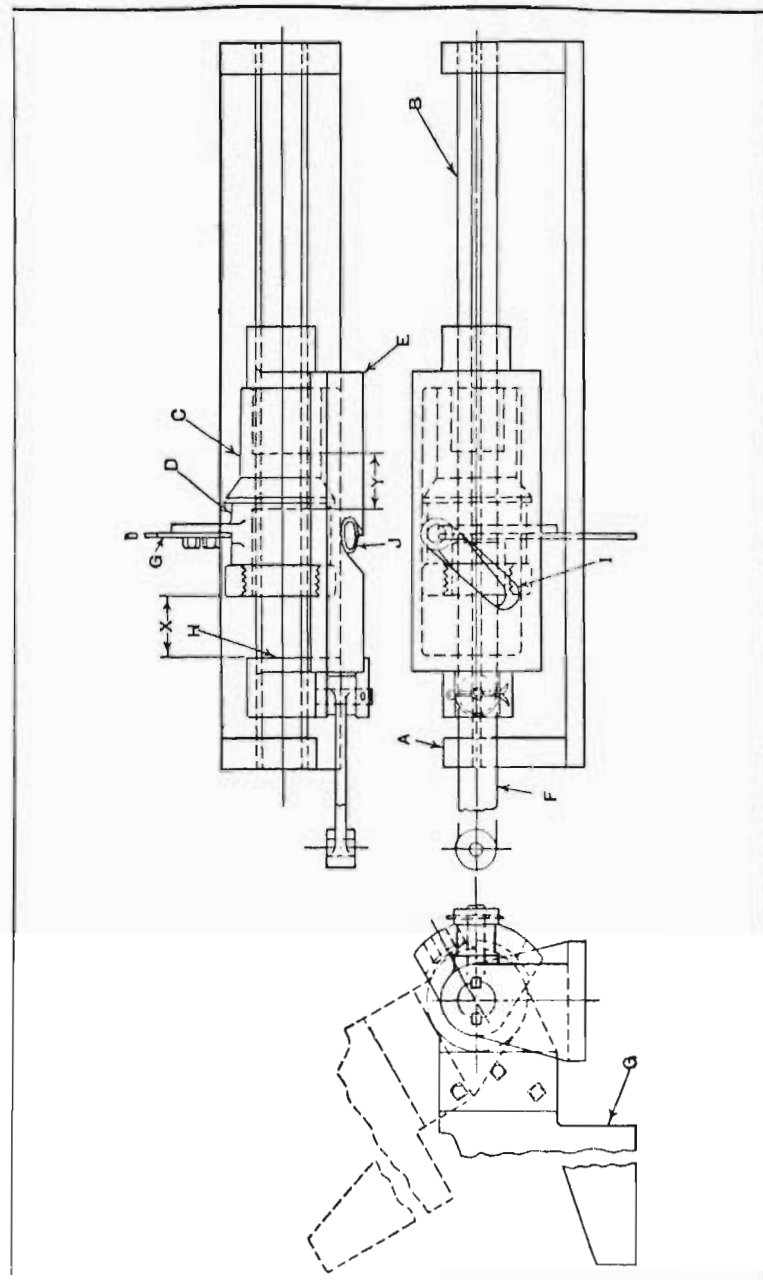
Combined Reciprocating and Elevating Movement Applied to Skimmer on Galvanizing Vessel
